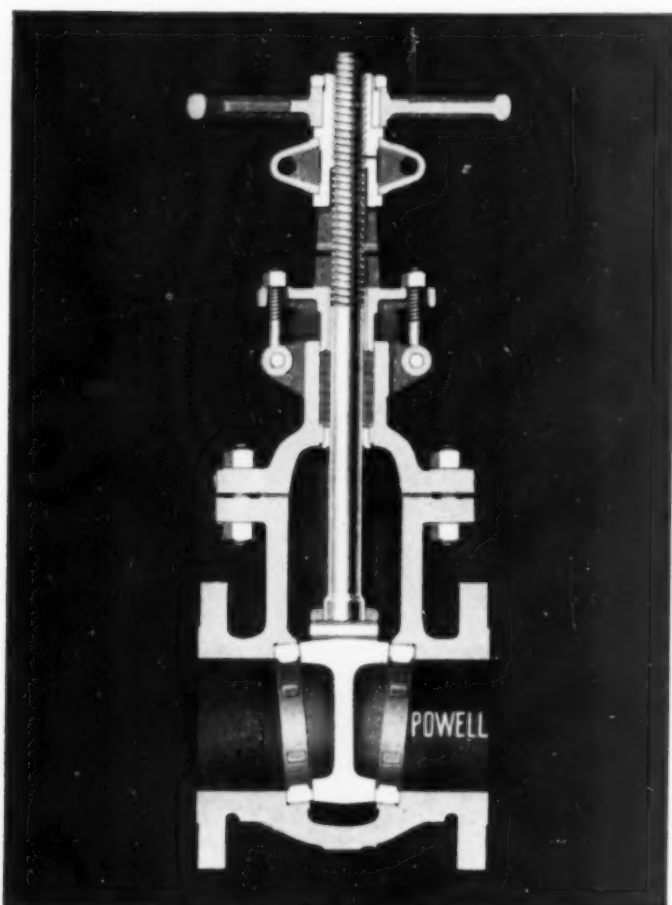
(sectional) —150-POUND CAST STEEL GATE VALVE. Flanged ends, bolted flanged bonnet with outside screw rising stem and yoke. Solid wedge. Available in sizes 1" to 24", inclusive.
